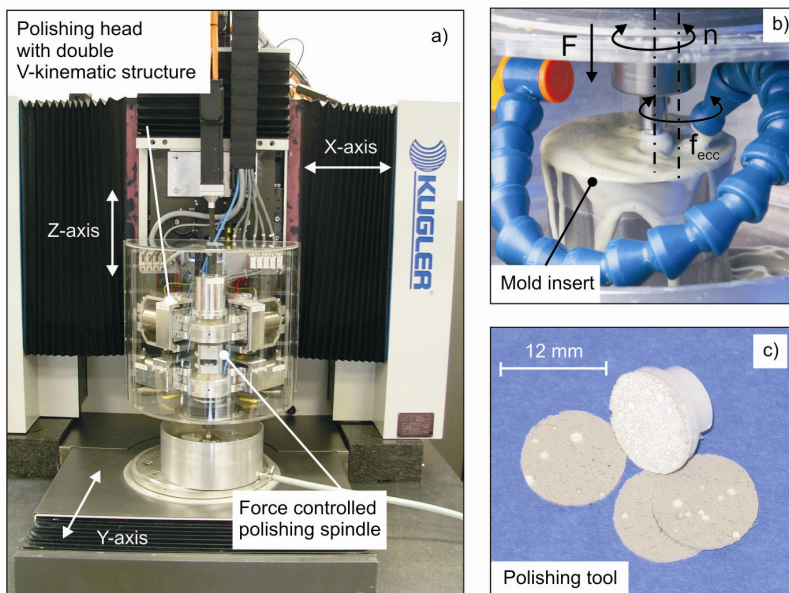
a) Machine tool setup used for investigations of the zonal polishing process, b) closer view on the polishing tool and process kinematic, c) polishing pad with polyurethane foil.
